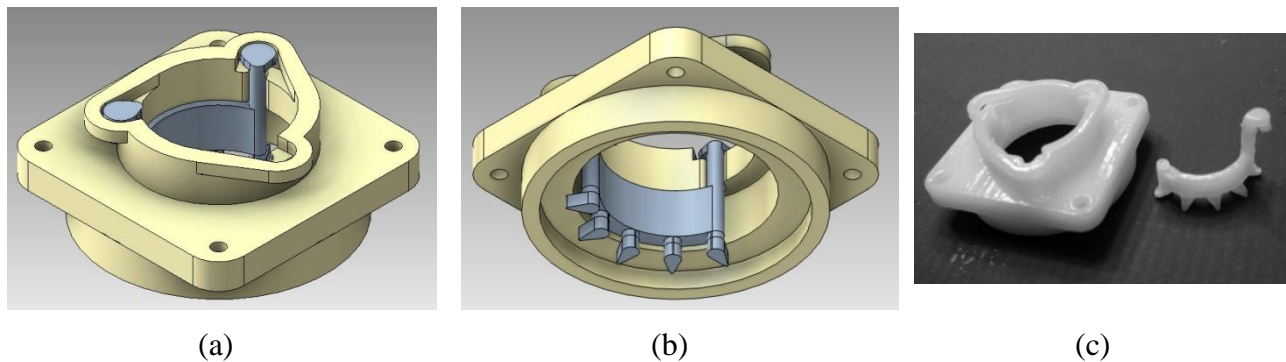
One pin hair removing socket with a single parting direction: (a) Designed model a top view, (b) Designed model a bottom view showing the pin, (c) Printed model
